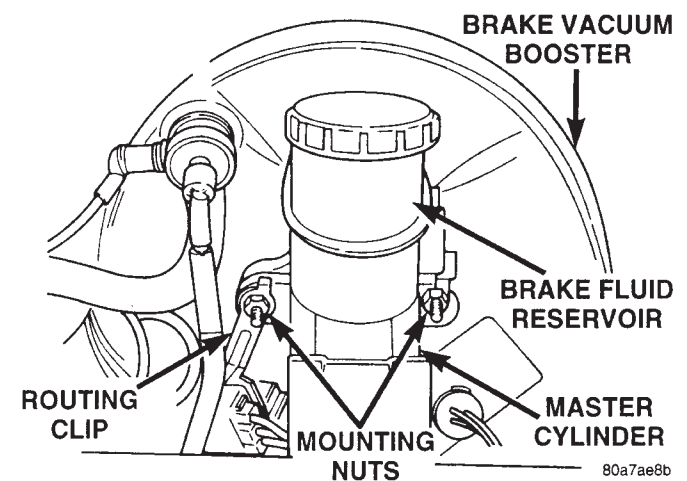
Master Cylinder Mounting To Vacuum Booster
